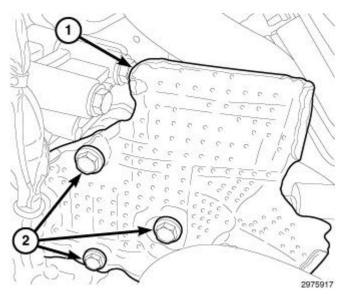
Power Steering Pump Heat Shield & Bolts Courtesy of CHRYSLER GROUP, LLC
